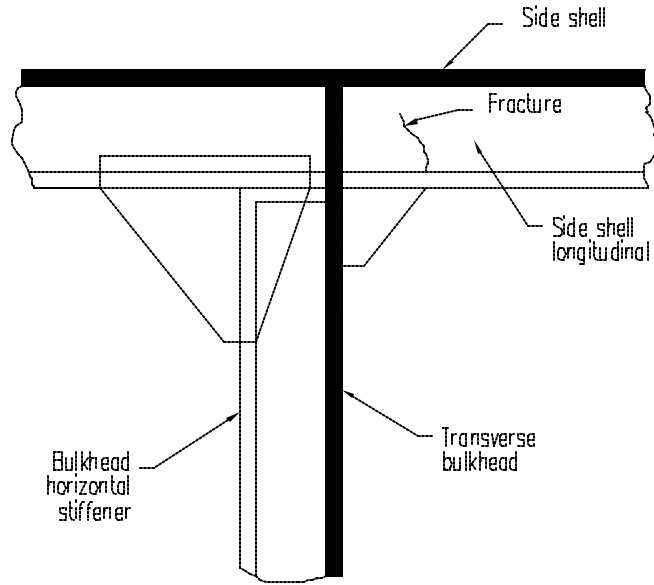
Fractured side shell longitudinal at tripping bracket connection, no backing bracket.
